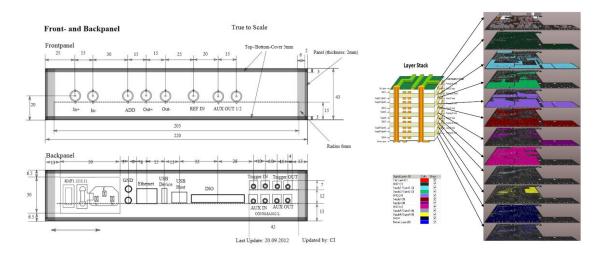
Left: Front and Back panel DIMID; Right: Layer Stack compact(left) and exploded(right) view
